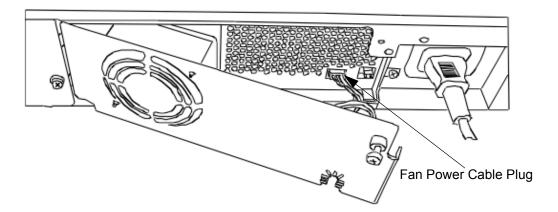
Opening Chassis Access Panel (19" Chassis)
